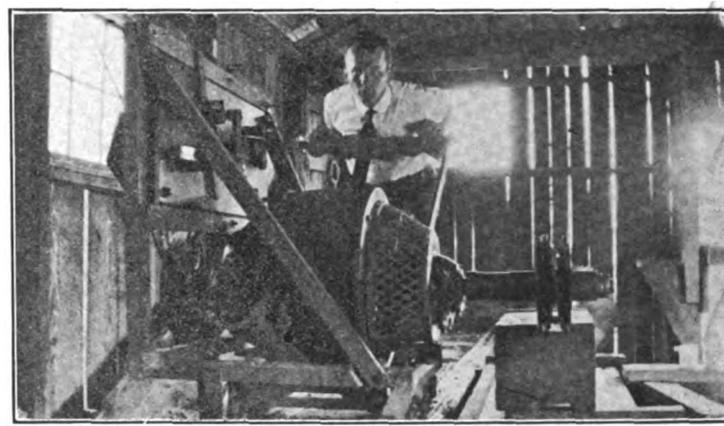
MOTOR DRIVING GROOVE CUTTER.
